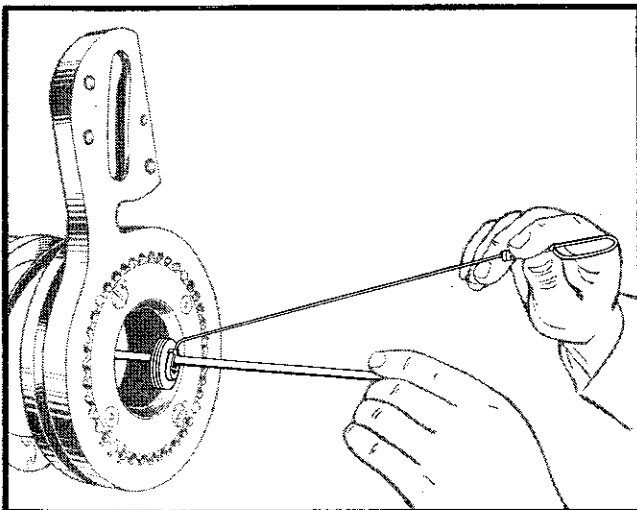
Adding Balancing Washers to Blade Balancing Plug
